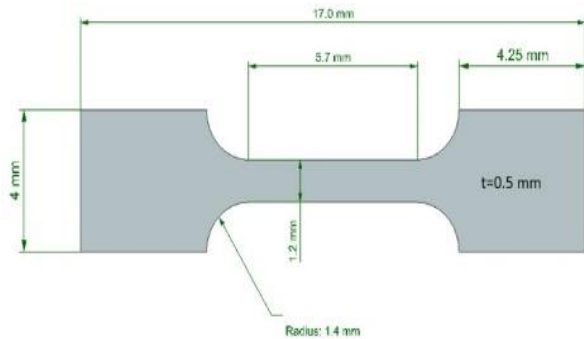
ASTM E8 – Sheet type tensile test specimen [12-13].
